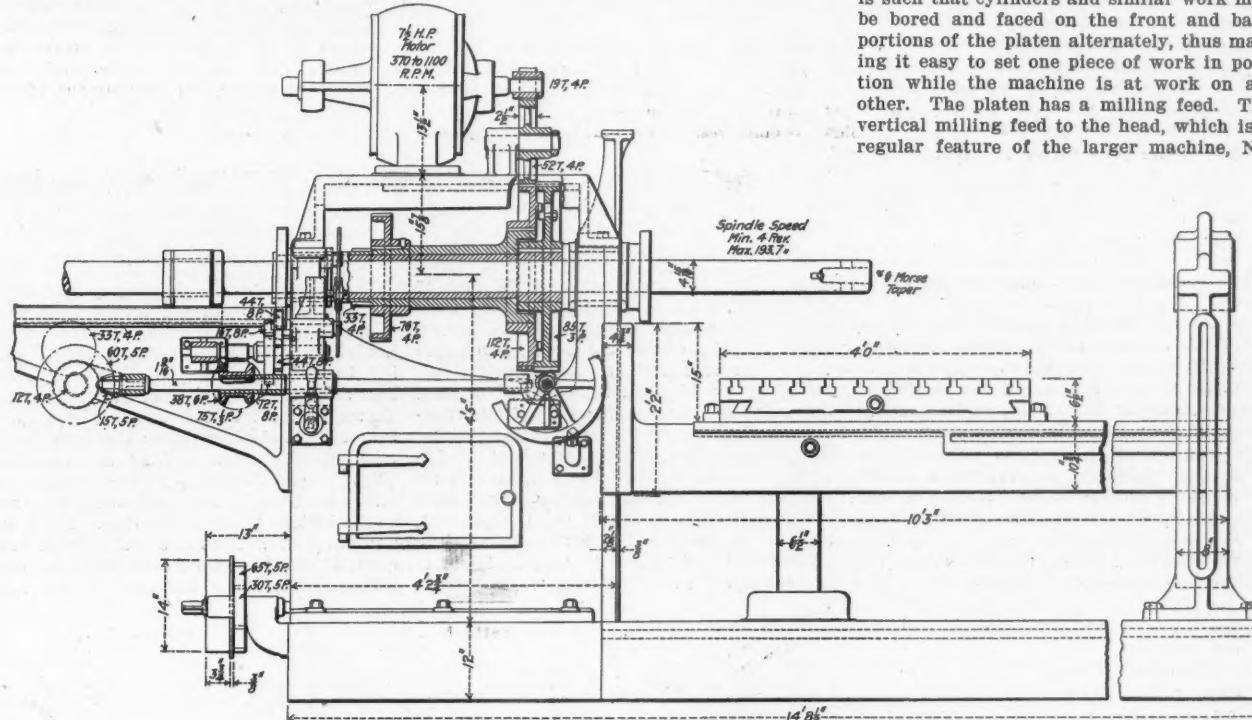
The Betts No. 3 Horizontal Boring Machine.
